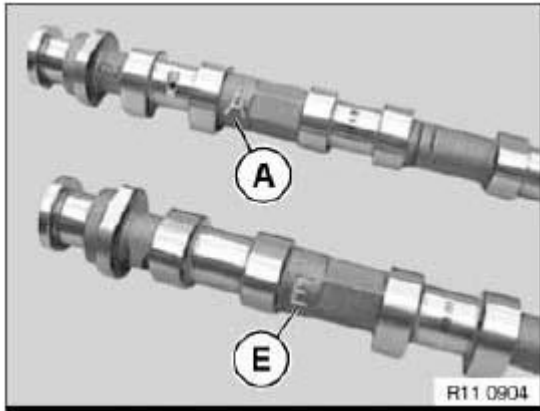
Identifying Exhaust Camshaft And Inlet Camshaft
